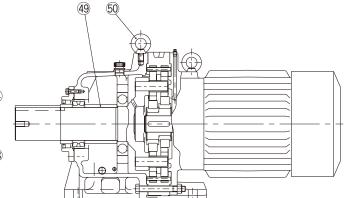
Type CHHM (Horizontal, Gearmotor), 1 Stage Reduction (Example: Frame size 6225)
